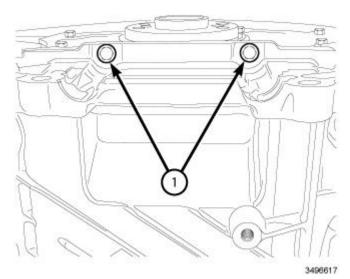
Rear Oil Seal Retainer Flange Bolts Courtesy of CHRYSLER GROUP, LLC
